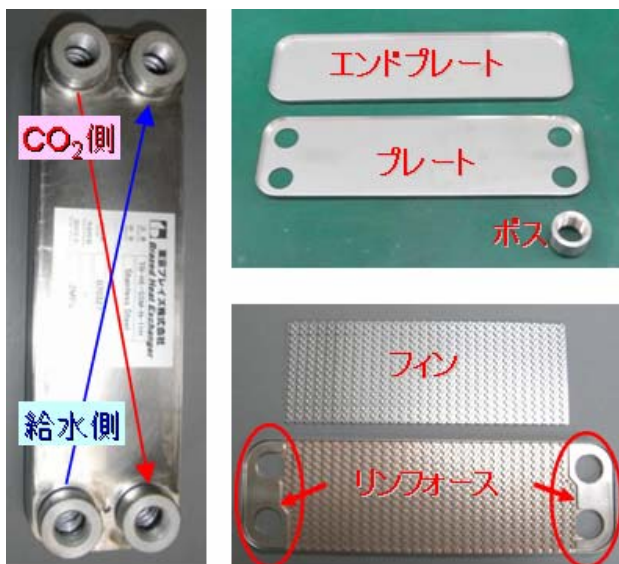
Component parts appearance of high-pressure resistant stainless steel plate heat exchangers.
